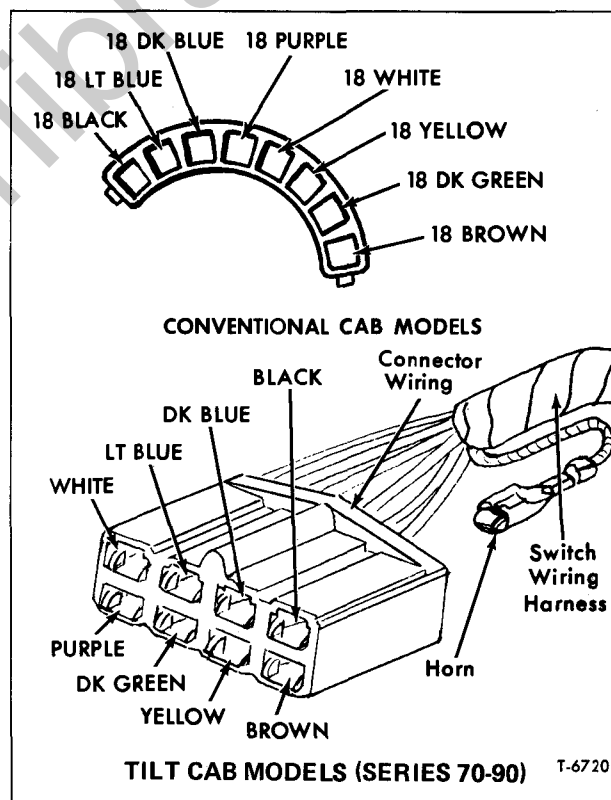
Directional Signal Wiring Harness Connector (Conv. Cab and 70-80 Tilt Cab)
